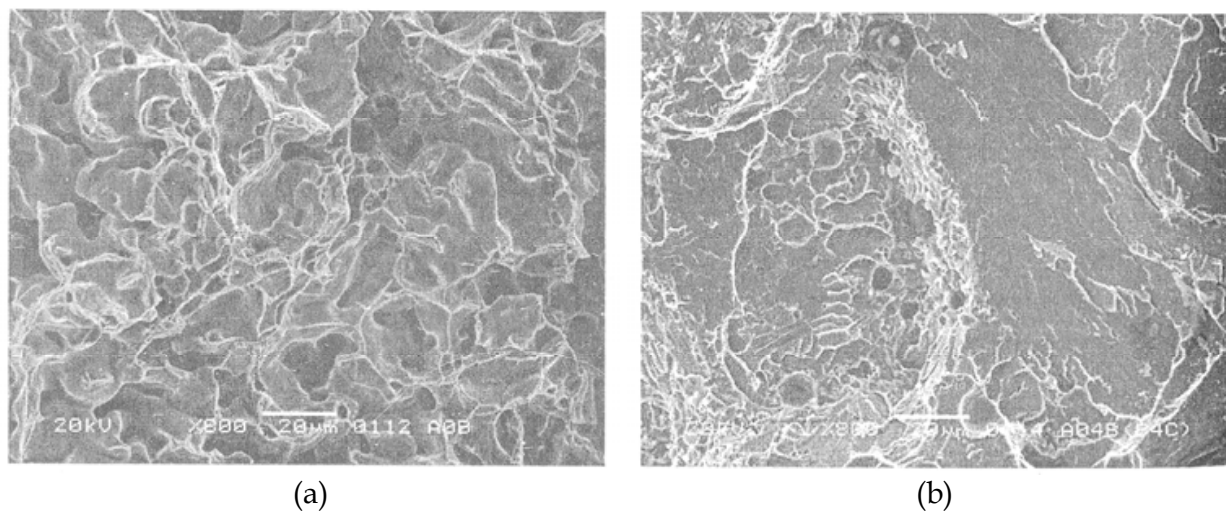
Fracture surface of unalloyed (a) and 0.4 % boron alloyed (b) sintered Astaloy CrM.
